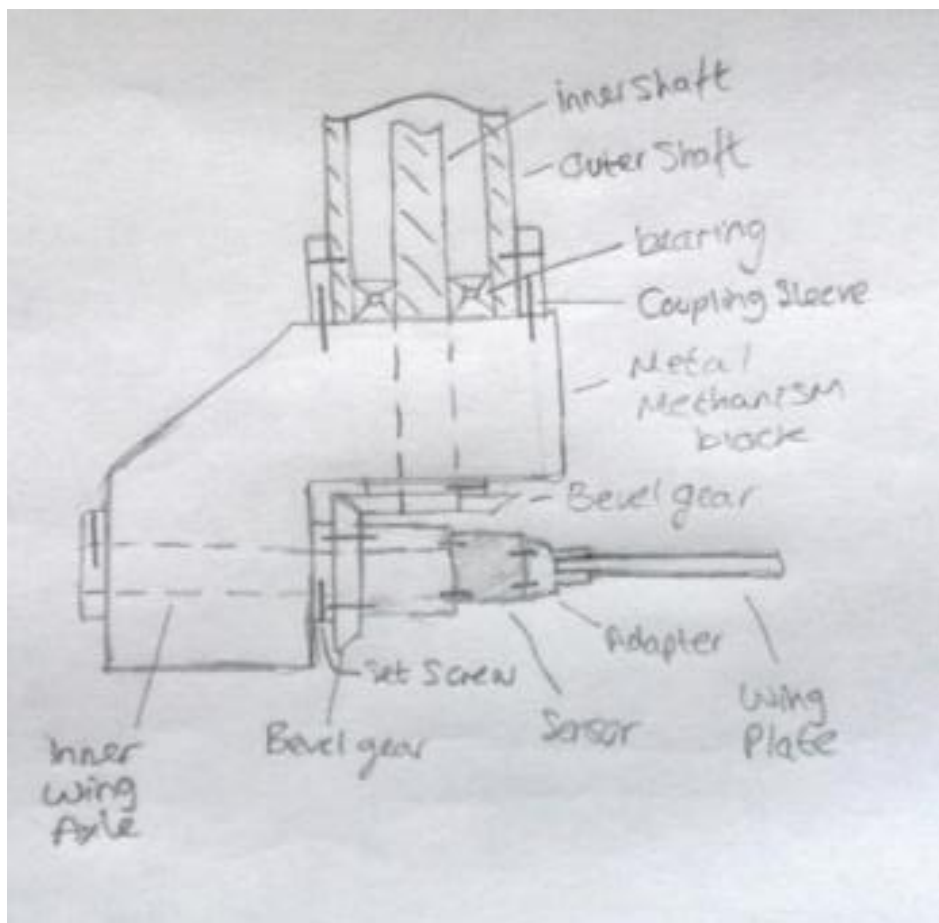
Initial design sketch of bevel gear sub-assembly
